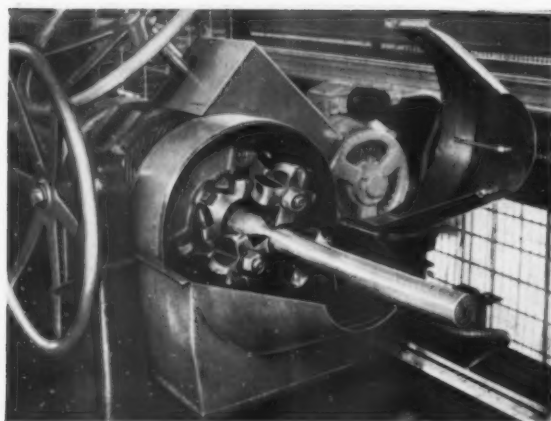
The swaging machine, with cowl raised to show the leading 12 in. or so of the tube swaged down on the core.
